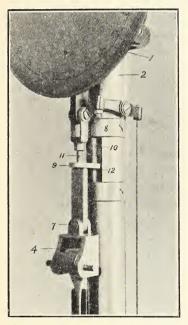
Detail of upper portion of machine shown in Fig. 11
